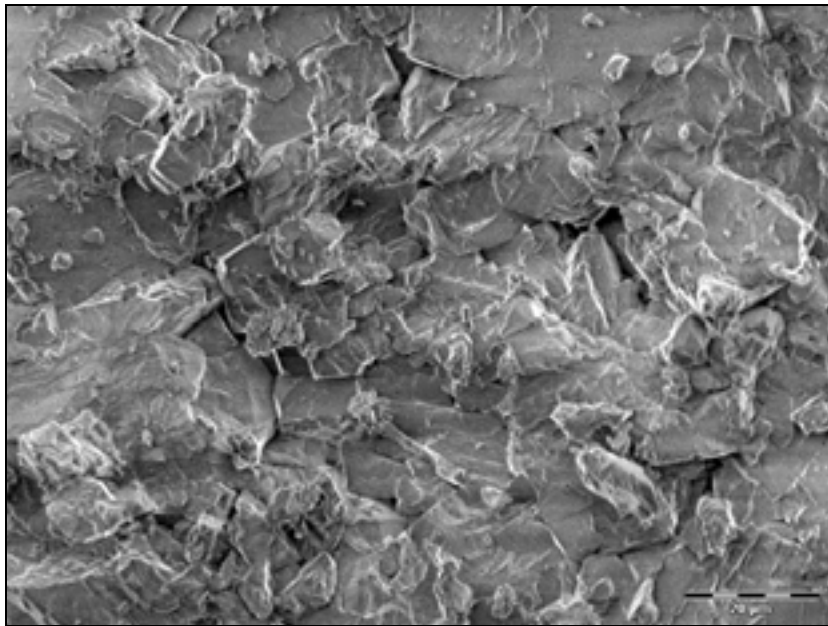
ESEM photo of fracture surface for type IV.
